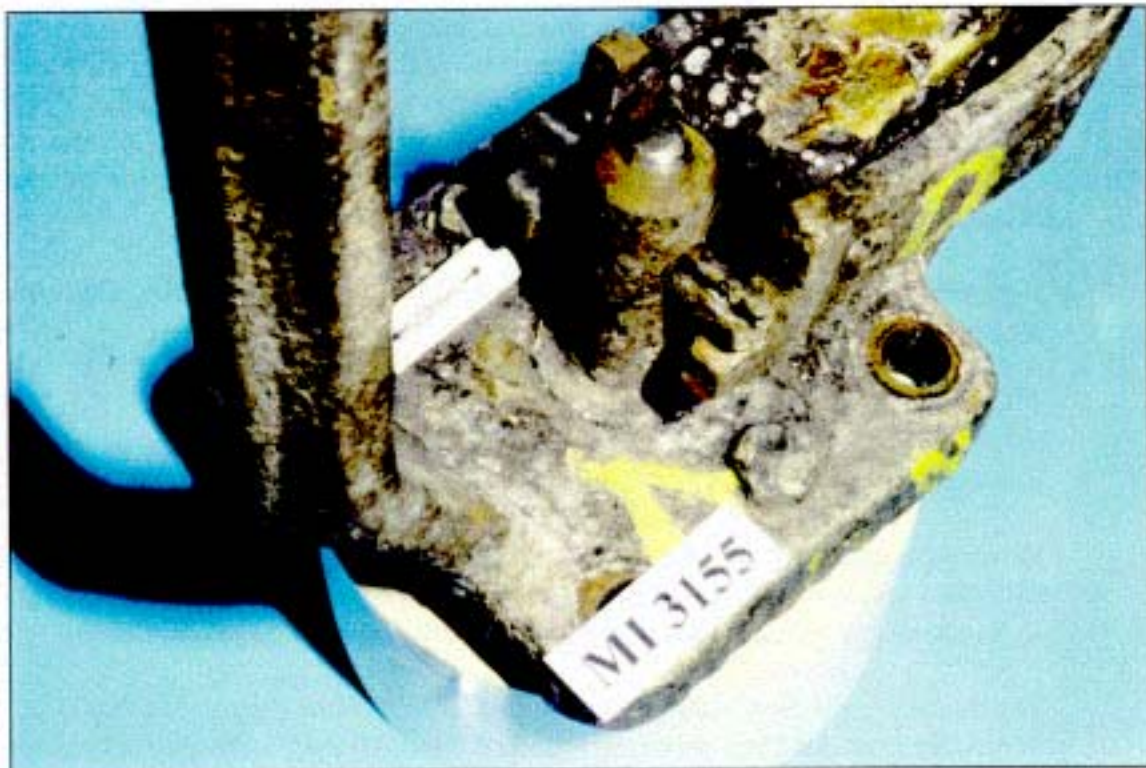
Aft side valve lid and spindle, showing bright hammer type marks at the spindle top
